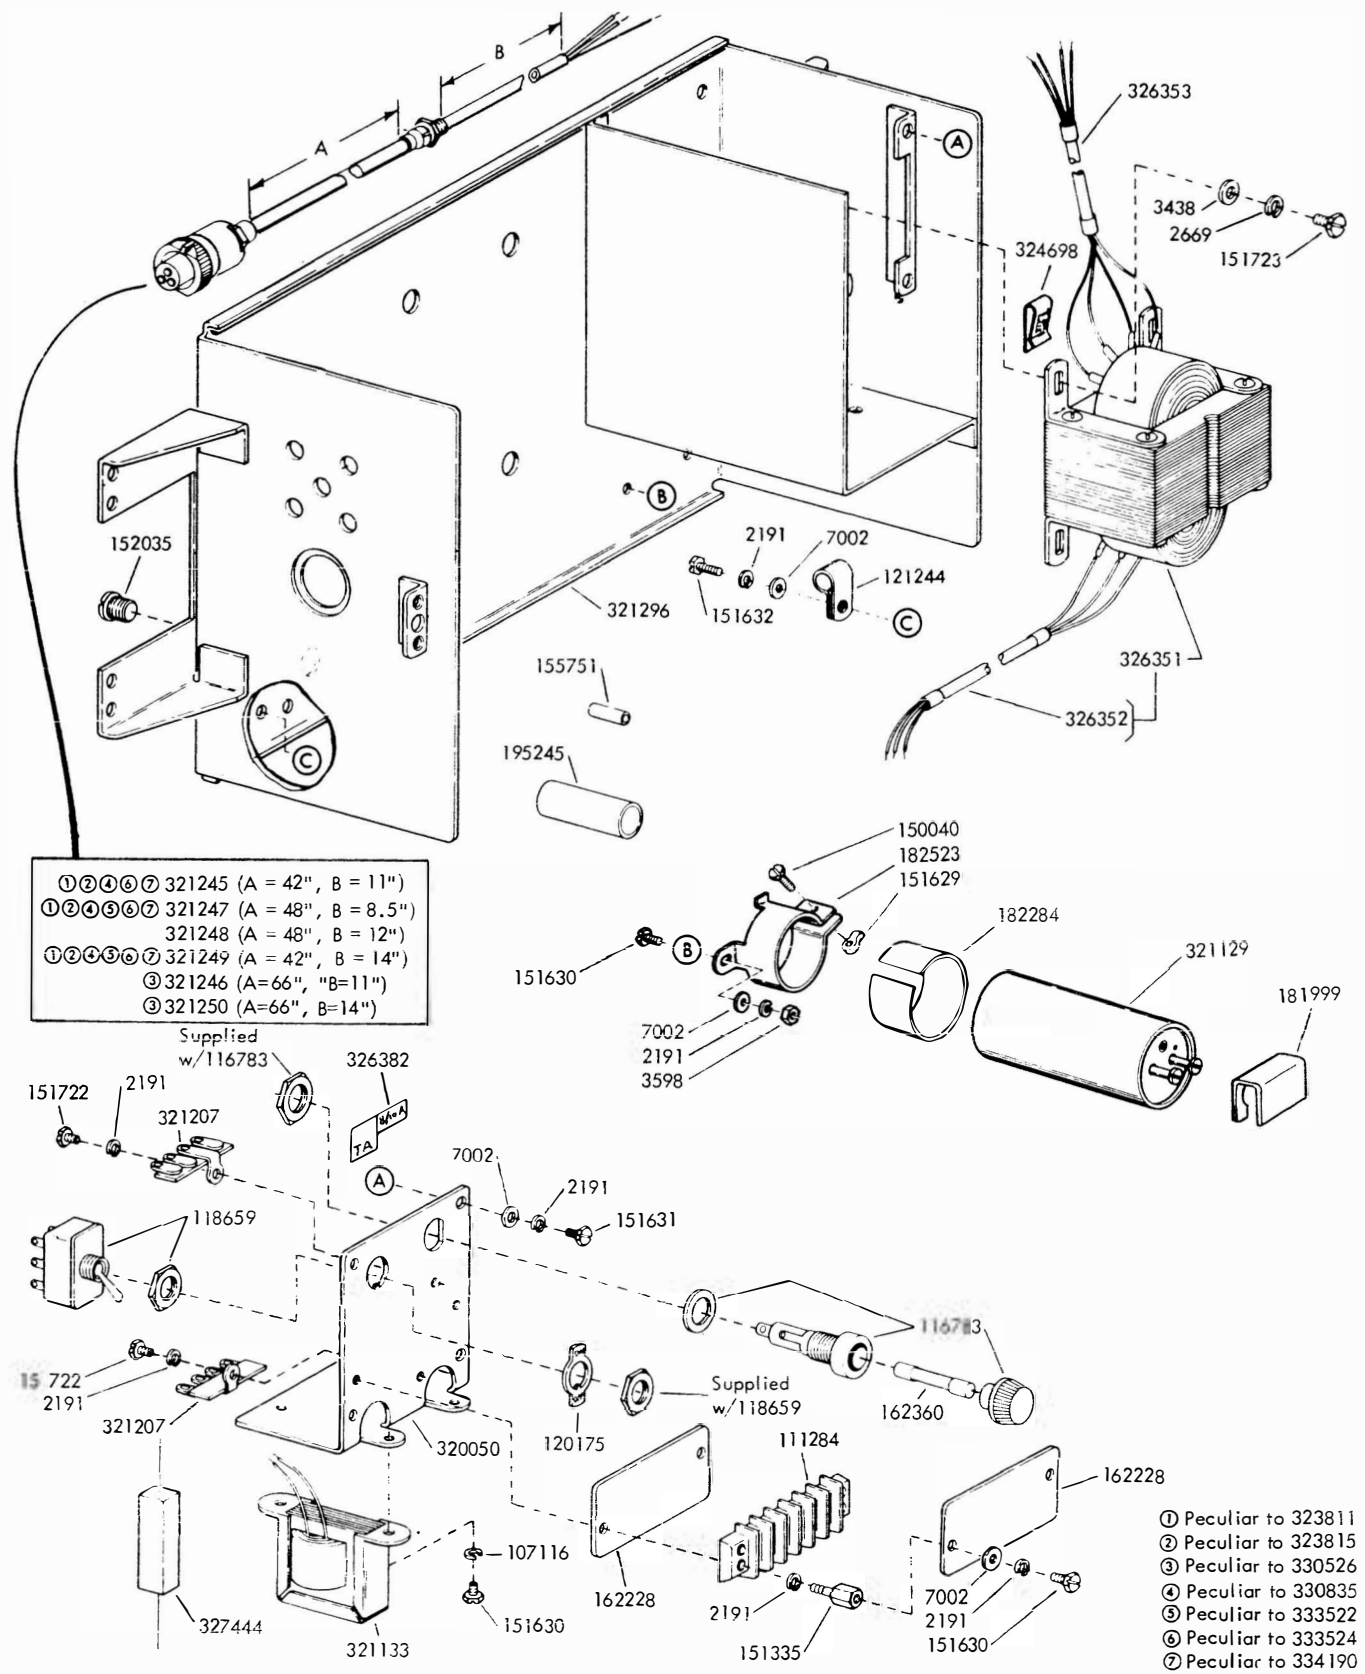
323811, 323815, 330526, 330835, 333522, 333524 and 334190 ELECTRICAL SERVICE ASSEMBLIES - Used w/ASR Set
